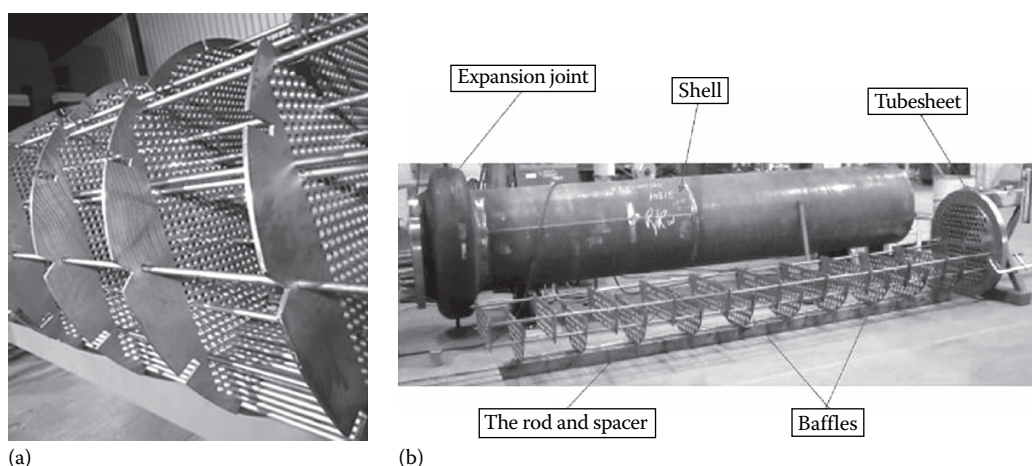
Heat exchanger assembly. (a) Helixchanger baffle cage assembly (Courtesy of Vermeer Eemhaven B.V., Rotterdam, the Netherlands) and (b) shell and tube heat exchanger under fabrication—baffle assembly is shown adjoining shell. (Courtesy of Festival City Fabricators, div. of CSTI, Stratford, Ontario, Canada.)
